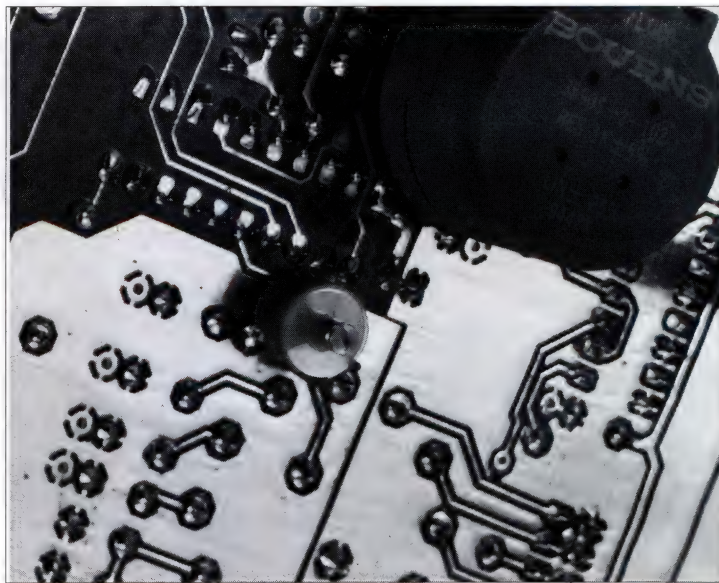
Detail showing how trimmer C₇ is fitted at the trackside of the mother board.
